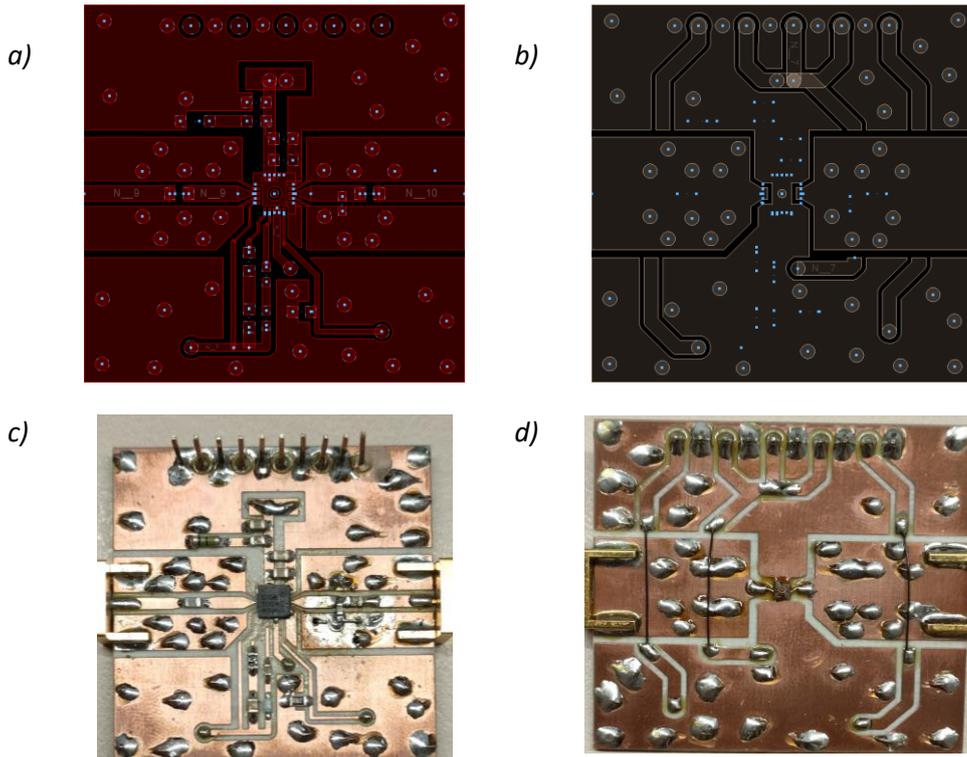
The layout a) top layer b) bottom layer and physical pictures c) top view d) bottom view of the basic PCB
